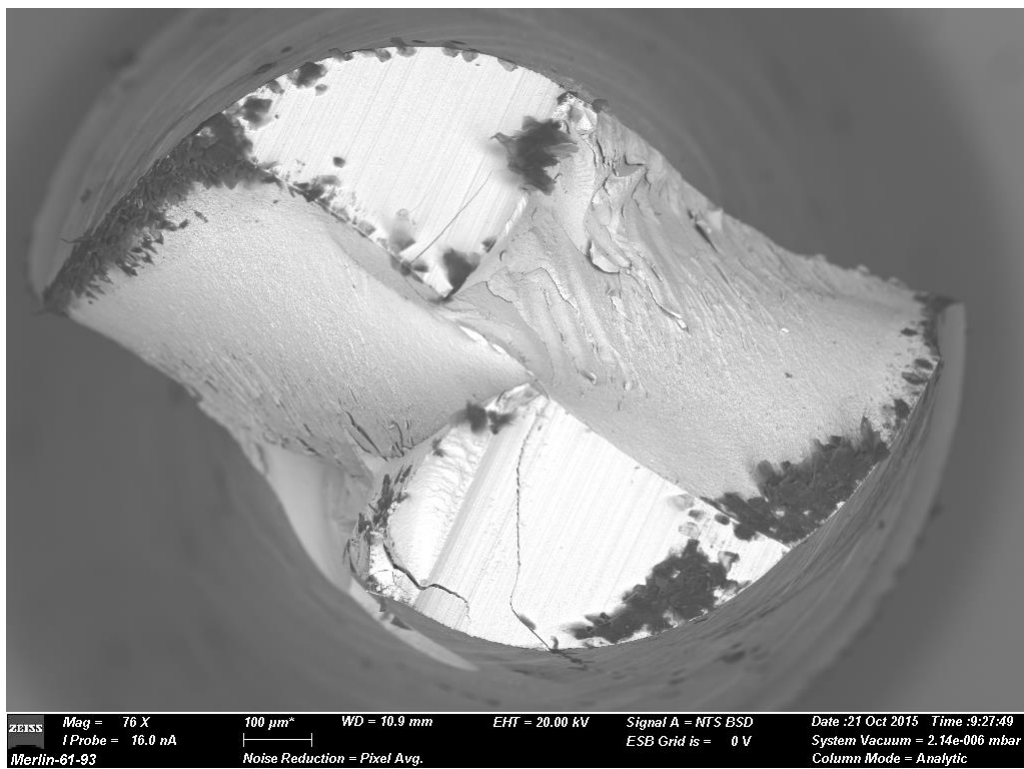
Experimental run 5: Tungsten carbide tool after machining with parameters $v_c=80.11$ [m/min], $v_f=694.7$ [mm/min] and $a_p=143.58$ [μm]
